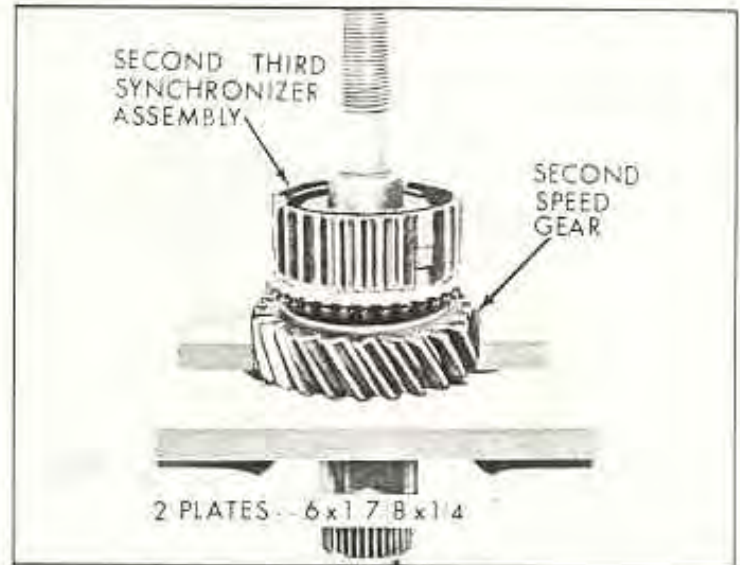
B-18 Removing Second - Third Synchronizer and Gear
